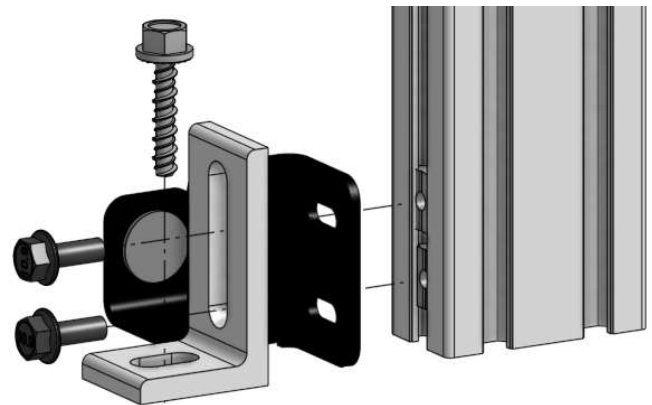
Sandwich the door guide bracket between the slotted corner bracket and frame.
